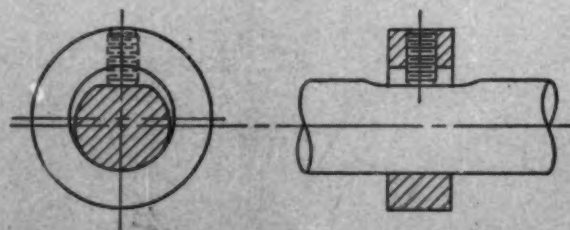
Actual assembled condition produced with setscrew collar having oversize hole
